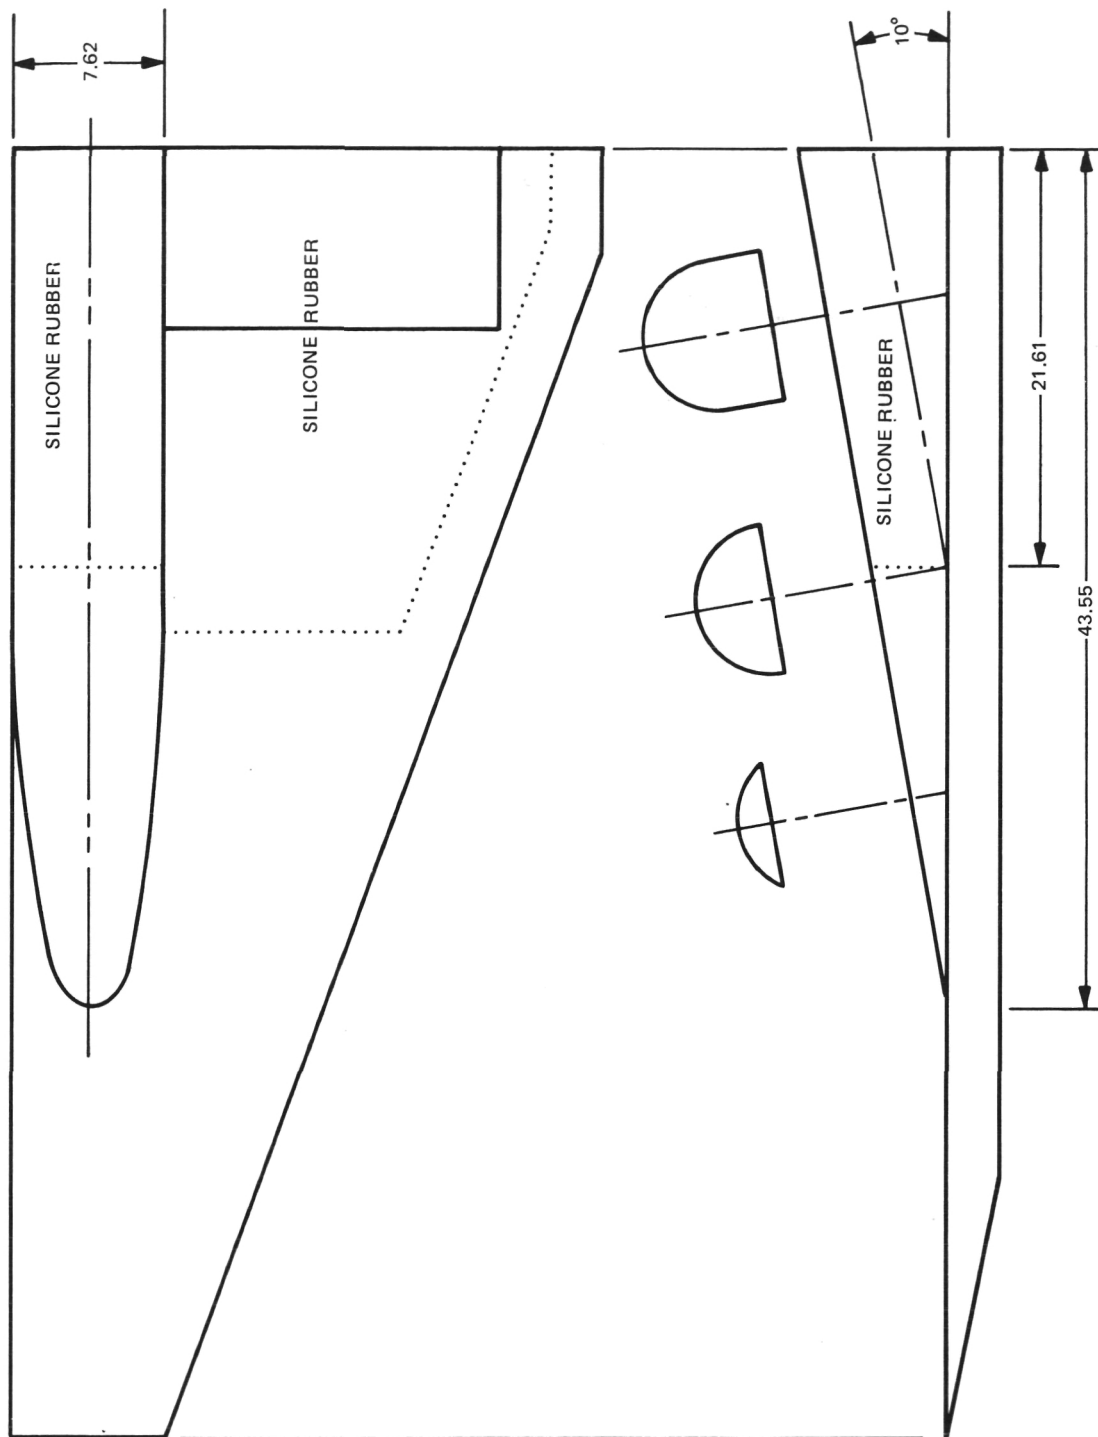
Sketch of cylindrical body attached to 70° wing. Linear dimensions are in cm.
